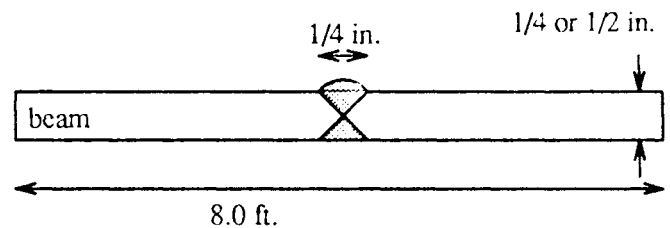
Geometry and dimensions of the double-V butt weld on a beam.
